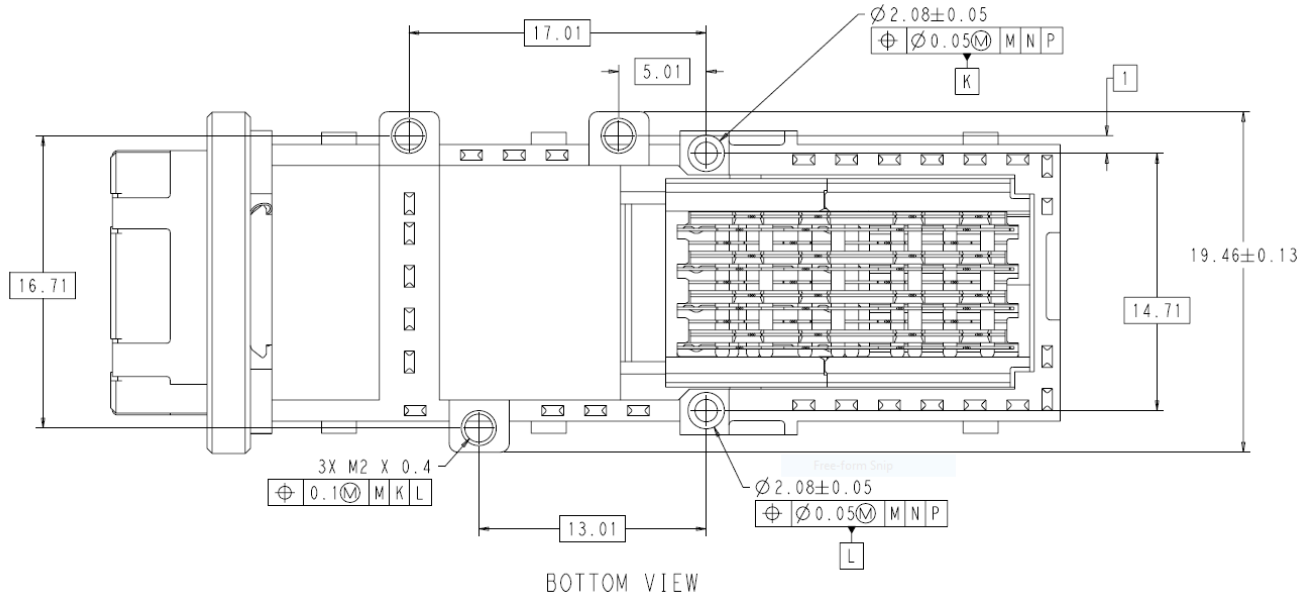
X4 Through Hole Cage/Connector Assembly
